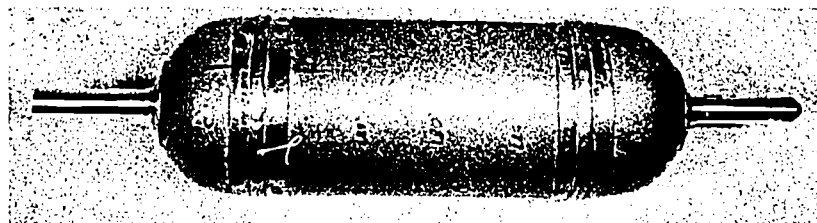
shows a second 260-inch-diameter casing which was welded by the multi-pass technique. This casing passed the hydraulic proof test and subsequently was successfully ground test-fired. This engine, incidentally, uses an ablative nozzle with an 89-inch-diameter throat. The chamber pressure is 600 psi and the flame temperature  $5500^{\circ}$  F with a 2-minute firing time.
